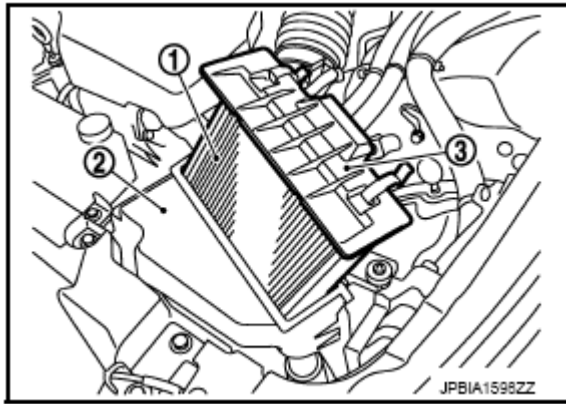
Identifying Holder, Air Cleaner Case And Filter
